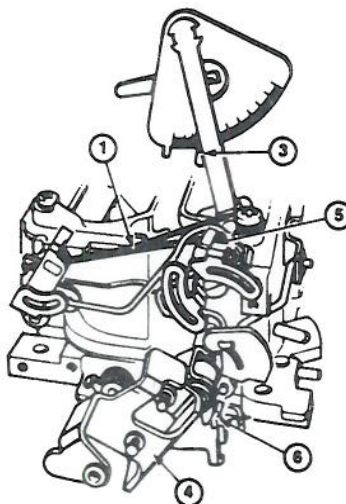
Unloader adjustment. 1983-86 2SE & E2SE carburetor
